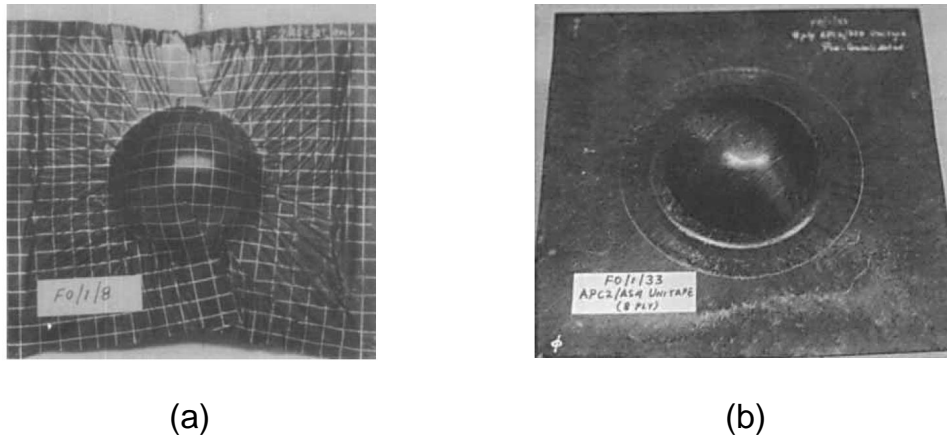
Forming of carbon/PEEK unidirectional laminates: (a) mould at room temperature, (b) mould at 400 °C [Cakmak+1991].
